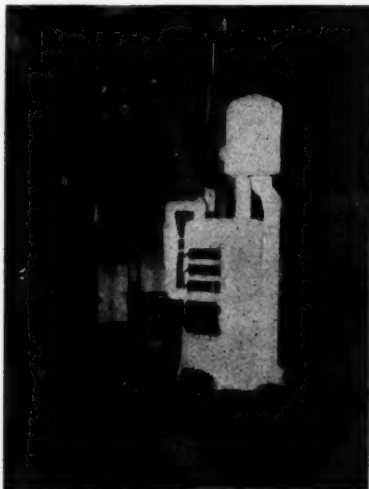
COMPLETE BOILER ASSEMBLED AS USED FOR SOLID FUELS
